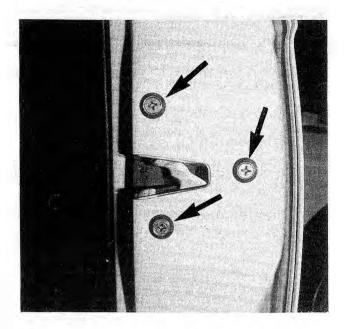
Lock assembly securing bolts (arrows) on edge of door.
